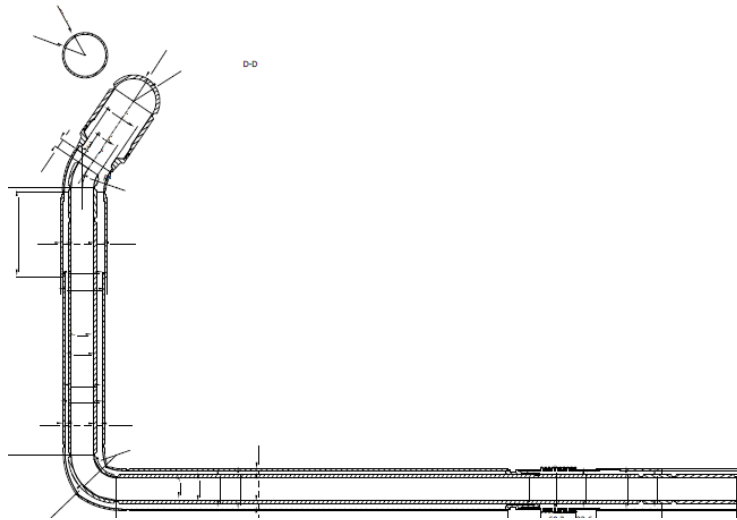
Outlet Connection Pipe CAD drawing from the specifications [1].
